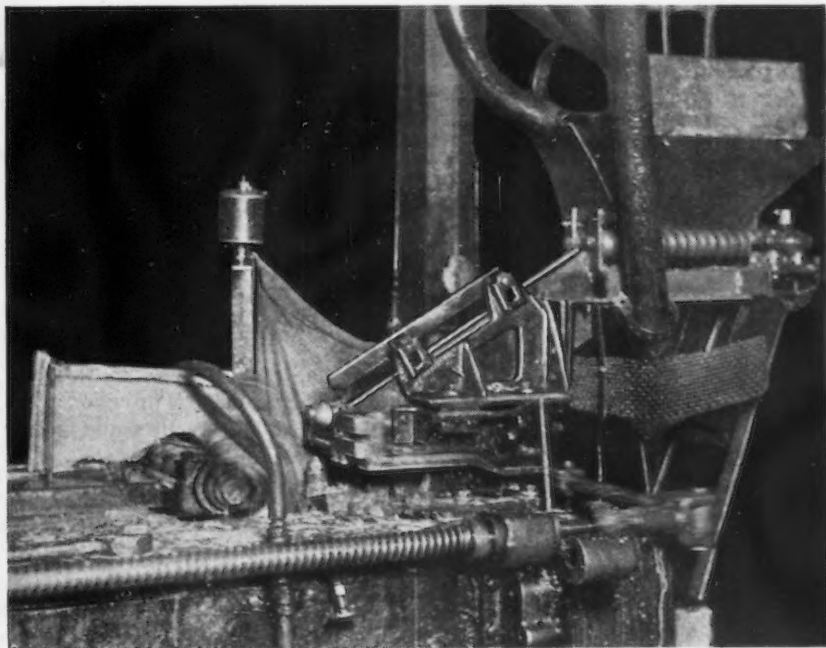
Bolt header equipped with dies to produce the valve forging shown at the right in Fig. 1. Both gathering and forging operations are performed at one heat.
